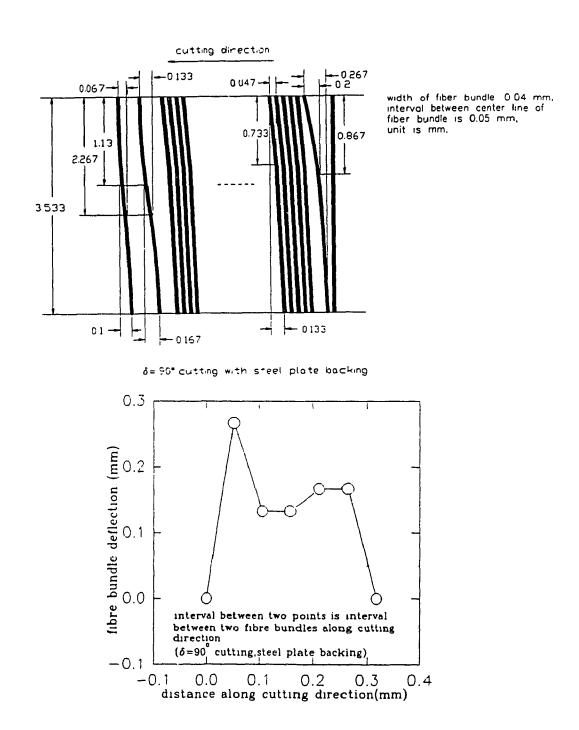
Fibre deflection after cutting of  $\delta$ =90° cutting with steel plate backing
